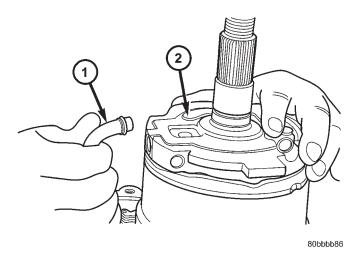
Disengage Oil Pump Tube From Oil Pump
